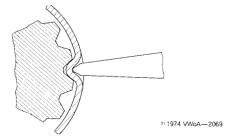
A blunt cold chisel being used to peen the round nut locking shoulder into the splines.
